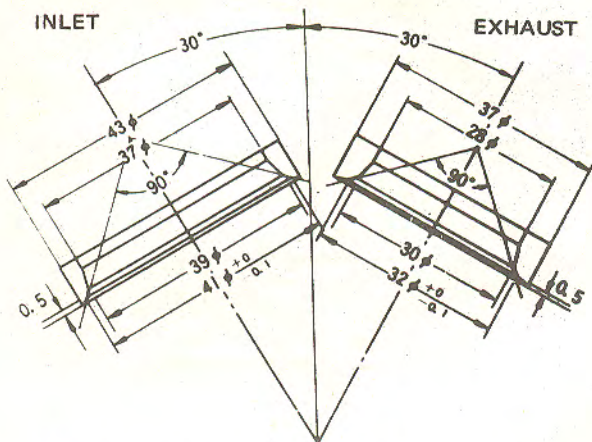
Dimensional drawings of the inlet and exhaust valve seats. All dimensions are given in millimetres.
